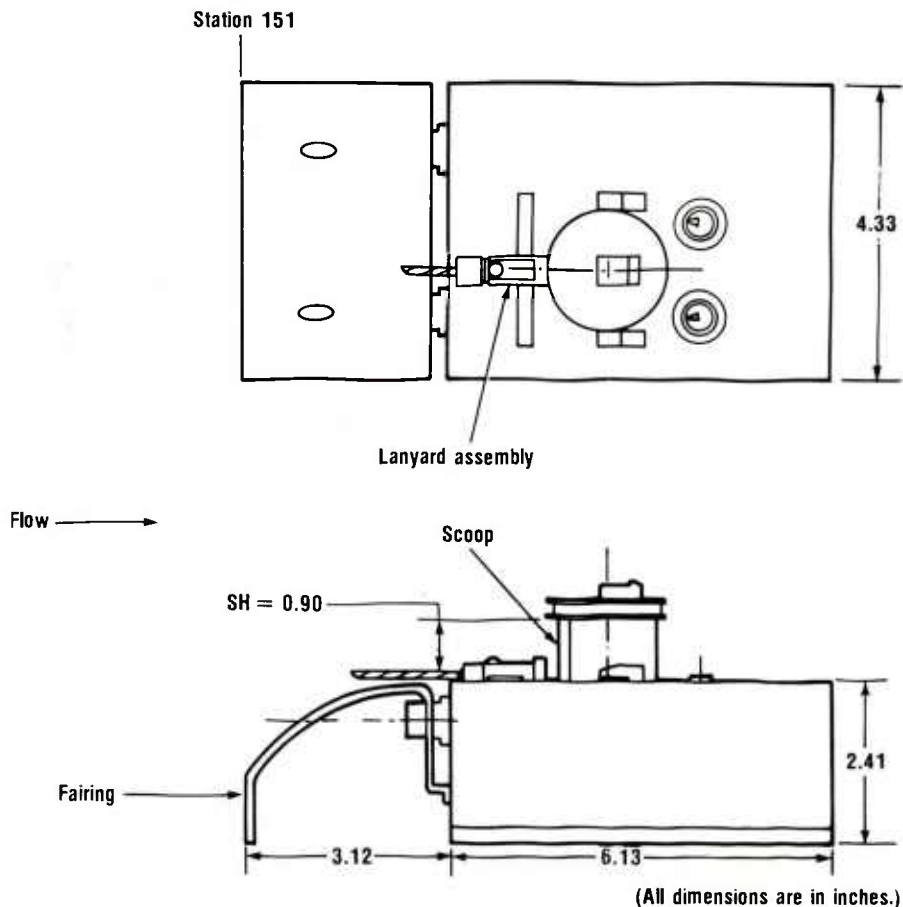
Schematic diagram of pop-up housing showing lanyard assembly.
